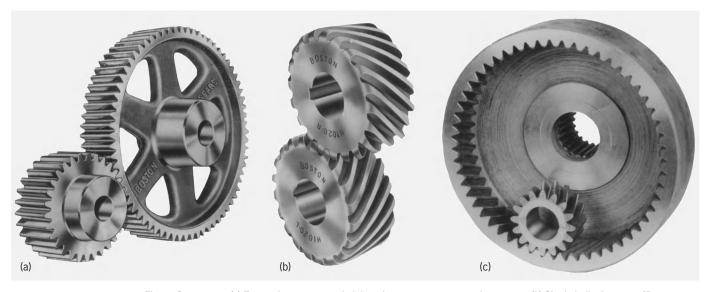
Spur gears. (a) External spur gear and pinion, the commonest type of spur gear. (b) Single helical gearset (Boston Gear Works). (c) Helical internal gear and pinion (Fellows Gear Shaper Co.).
